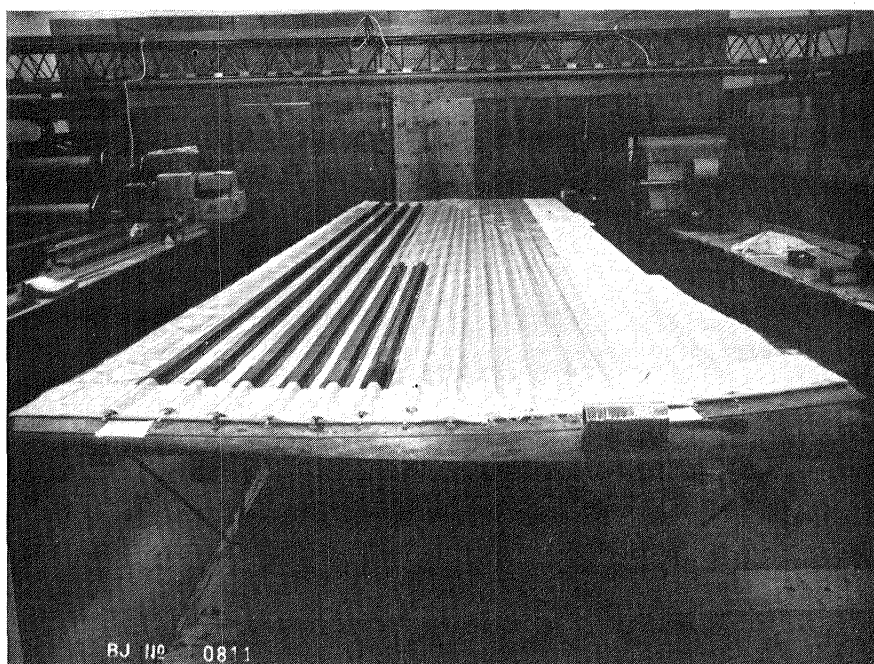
Caul Plates Being Installed Over Hat Stiffeners
